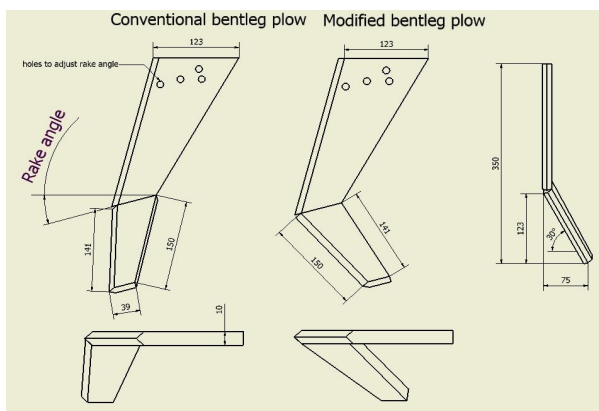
Dimensions in millimeters of the BL plow assembly developed in this study.
